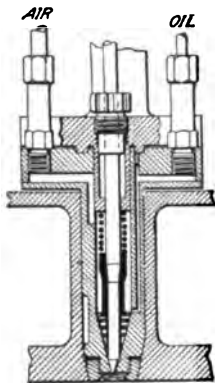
Fulton Machine Co. Diesel fuel valve.
